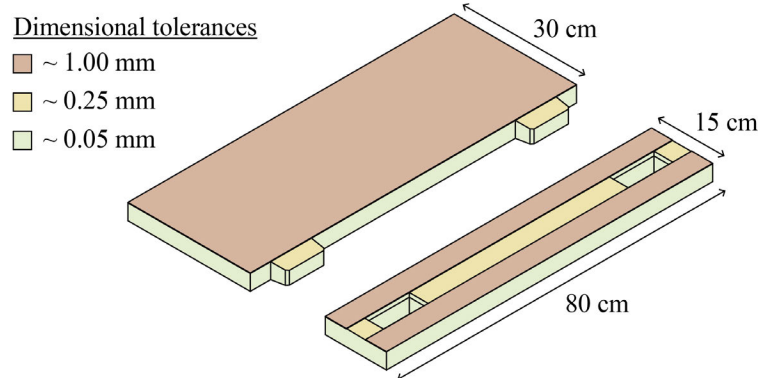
Variation of fabrication tolerance for the different faces of the male and female parts.
